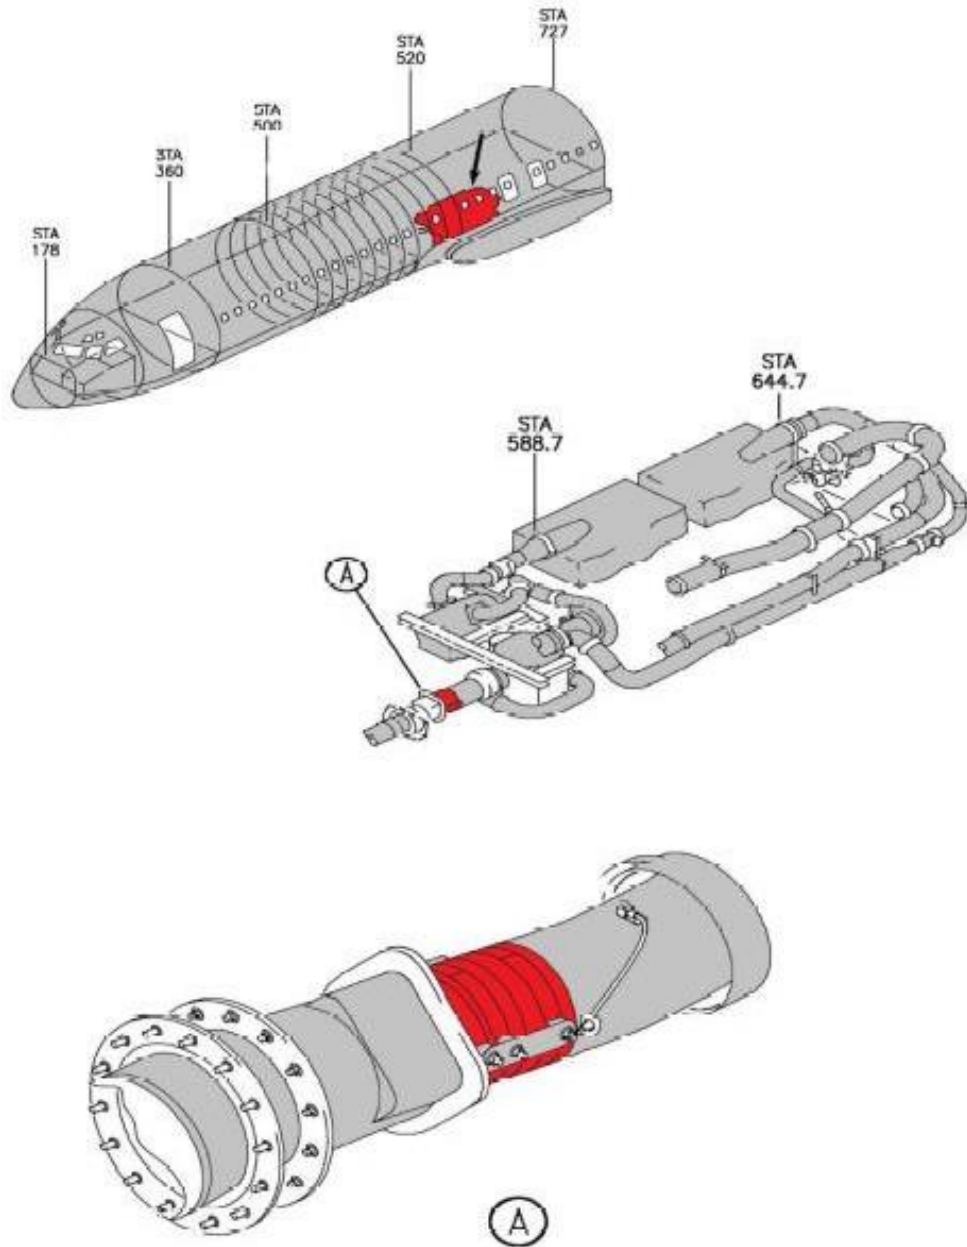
REPLACEMENT: MIX MANIFOLD PRESSURE SLEEVES (LEFT SIDE SHOWN).
